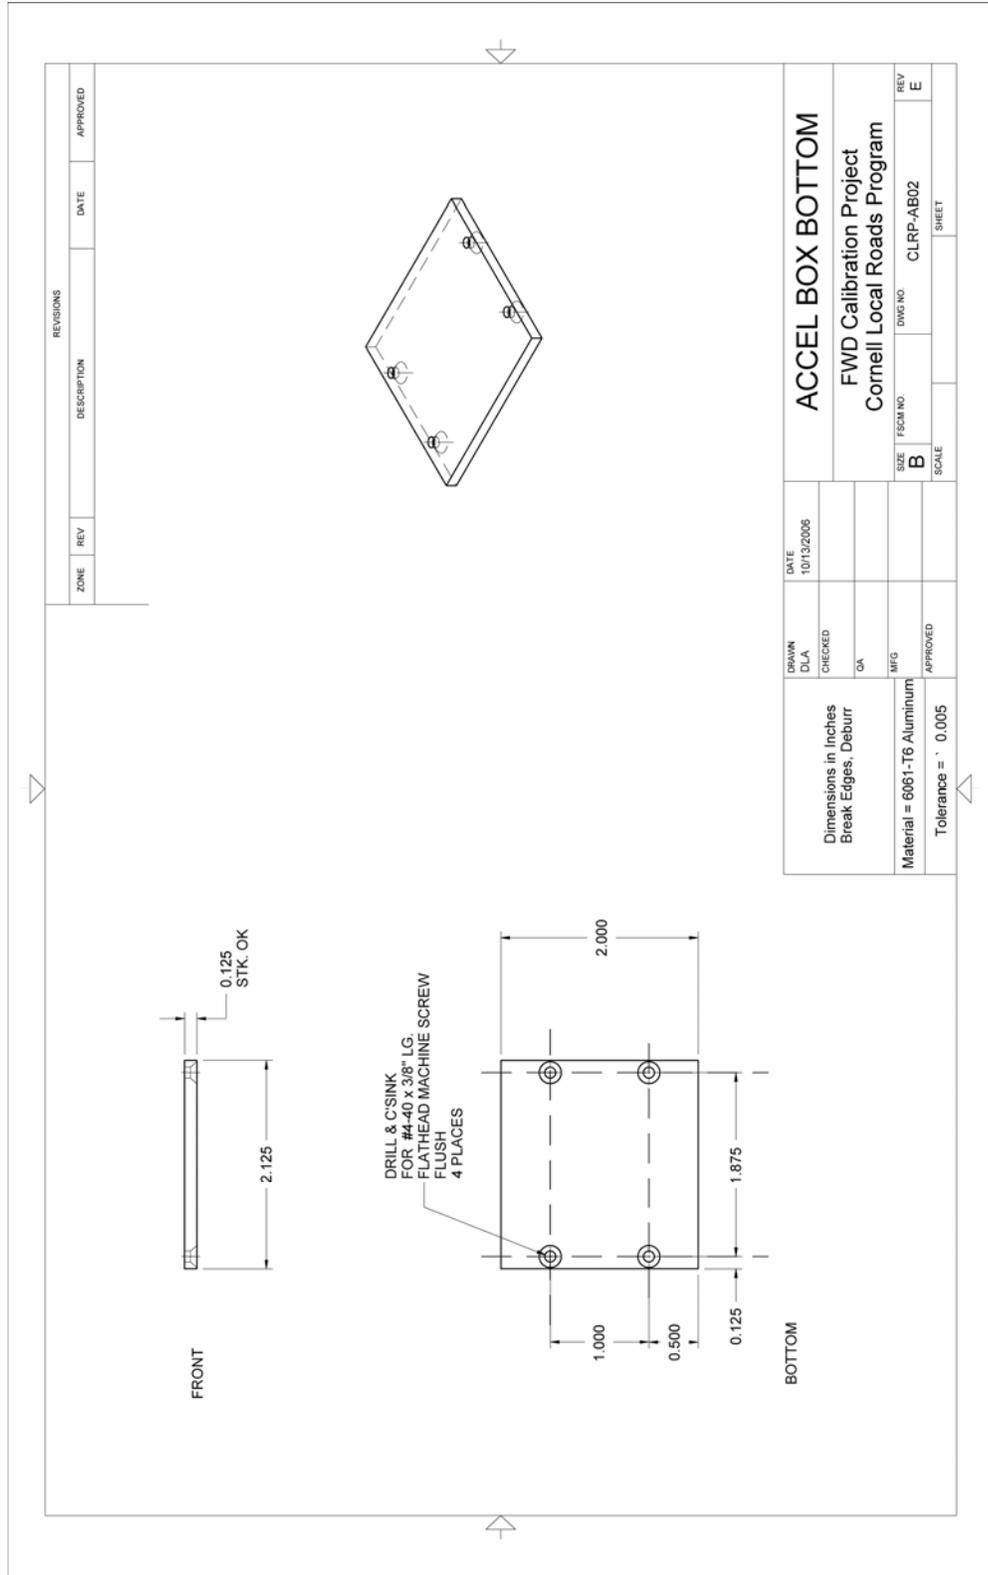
Drawing. CLRP-AB02 Accelerometer Box Bottom.
